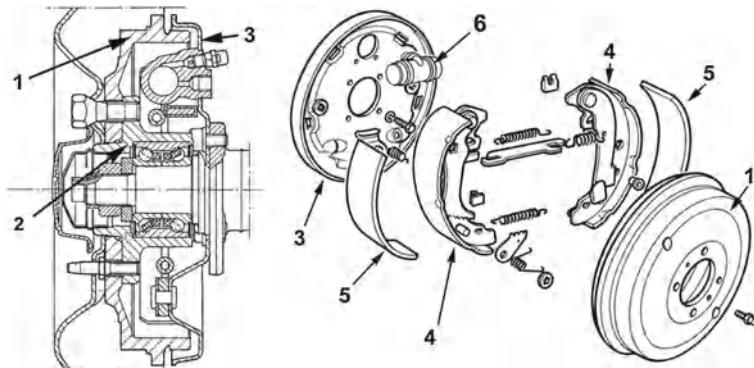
Drum brake components: 1 drum; 2 wheel hub; 3 brake plate; 4 brake shoes; 5 brake liners; 6 hydraulic cylinder (from Genta and Morello 2009)
